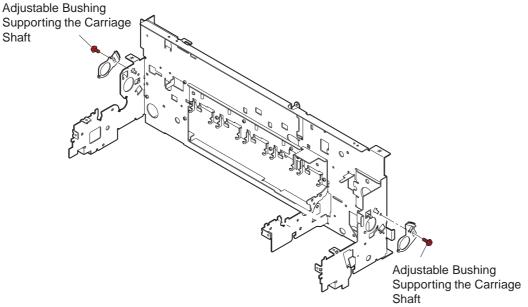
Adjustable Bushings Supporting the Carriage Shaft
